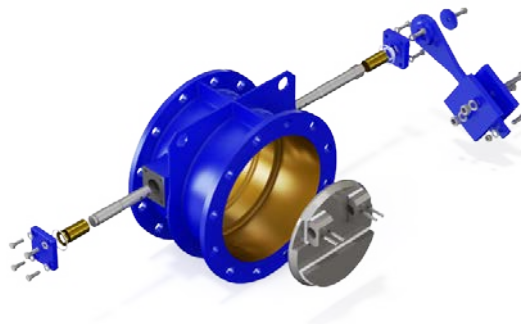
3D assembly model of the swing check valve with lever and weight – exploded view
